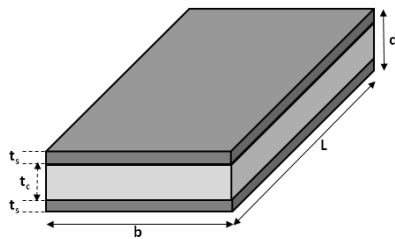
A schematic sketch of dimensions and cross section of sandwich beam
